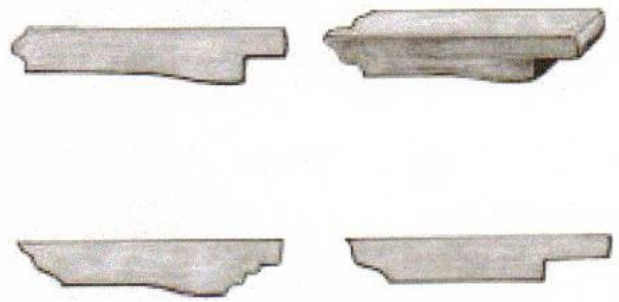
Above, correct. Below, incorrect. Left—initial shoulder backed off anvil too soon. Right—no upset remains for scarf to be laid upon during weld.
